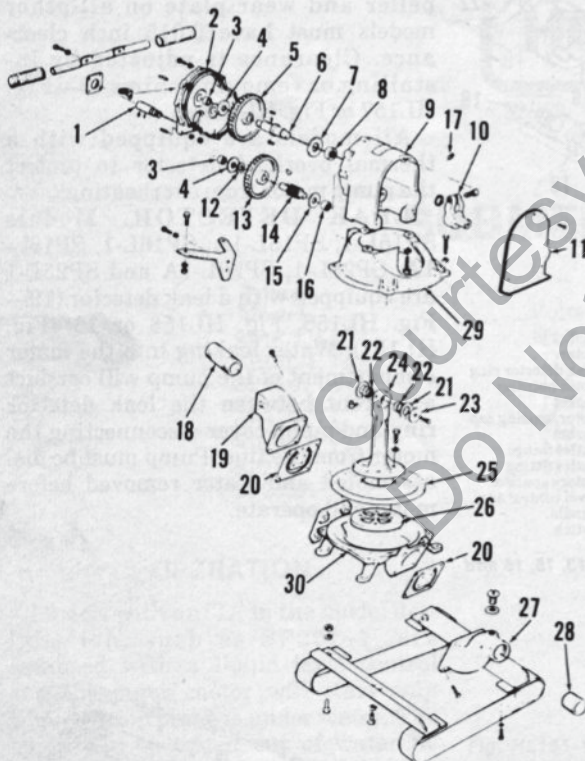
Exploded view of 111DP2-1 diaphragm pump.
